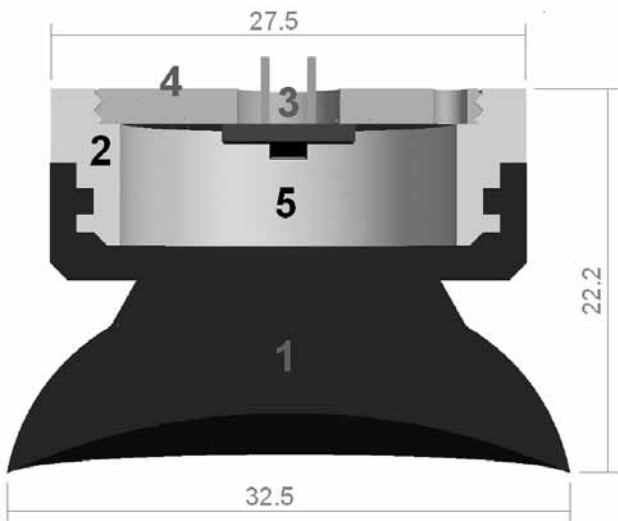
Hydraulic force sensor with main dimensions. The rubber part (denoted by 1) is vulcanized directly to the plastic body (denoted by 2).
